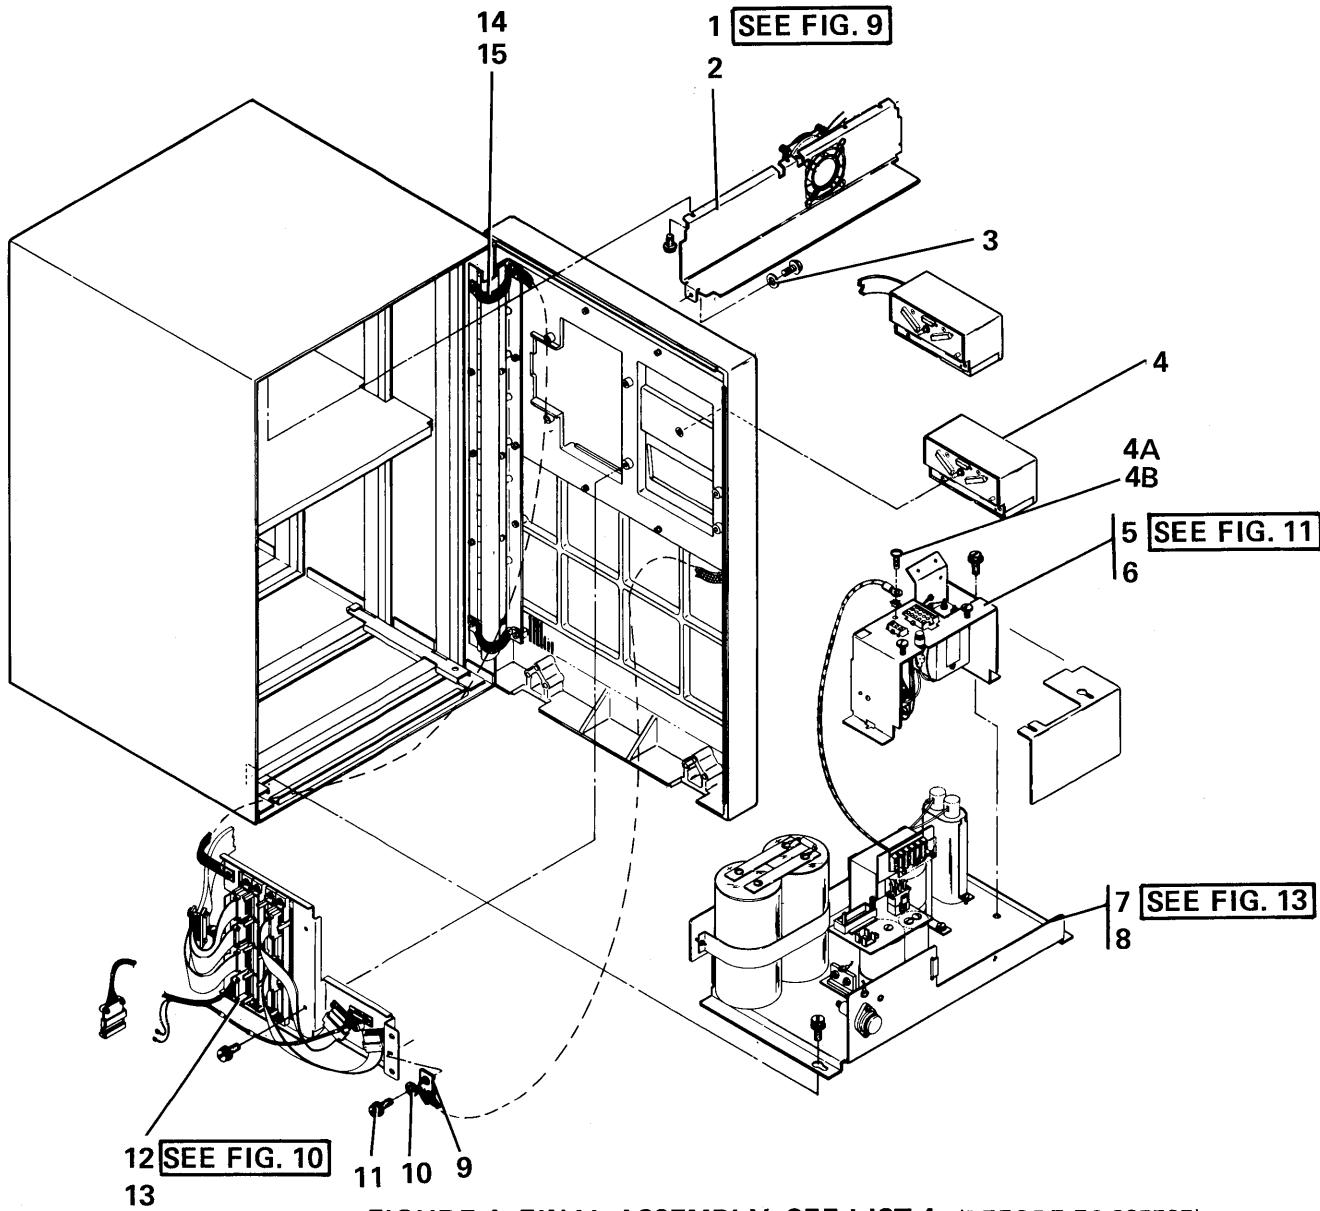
FINAL ASSEMBLY. SEE LIST 4. (BEFORE EC 835505)
